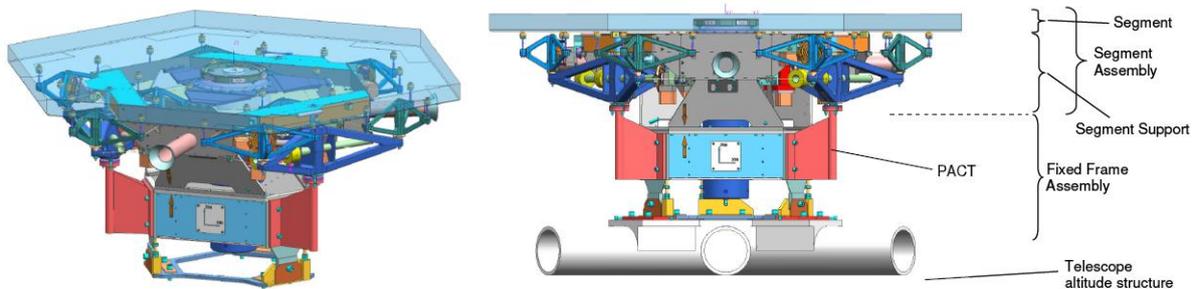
The segment assembly and its fixed frame assembly form a segment subunit.
